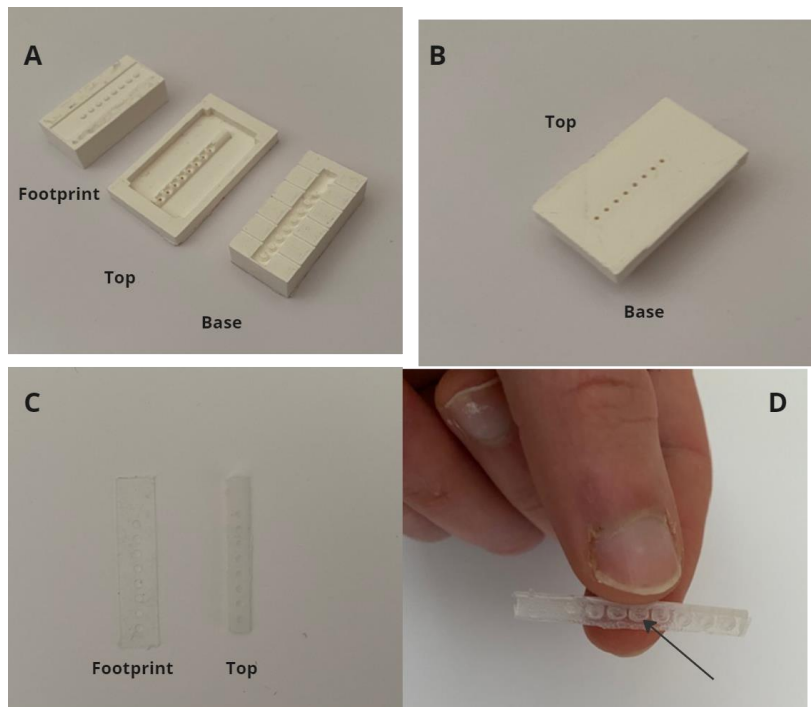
Images of the (A) the moulds, (B) assembly of the top and base part, (C) the cured footprint and top layer with the self-regulating valves, and (D) not forming of the pins.
